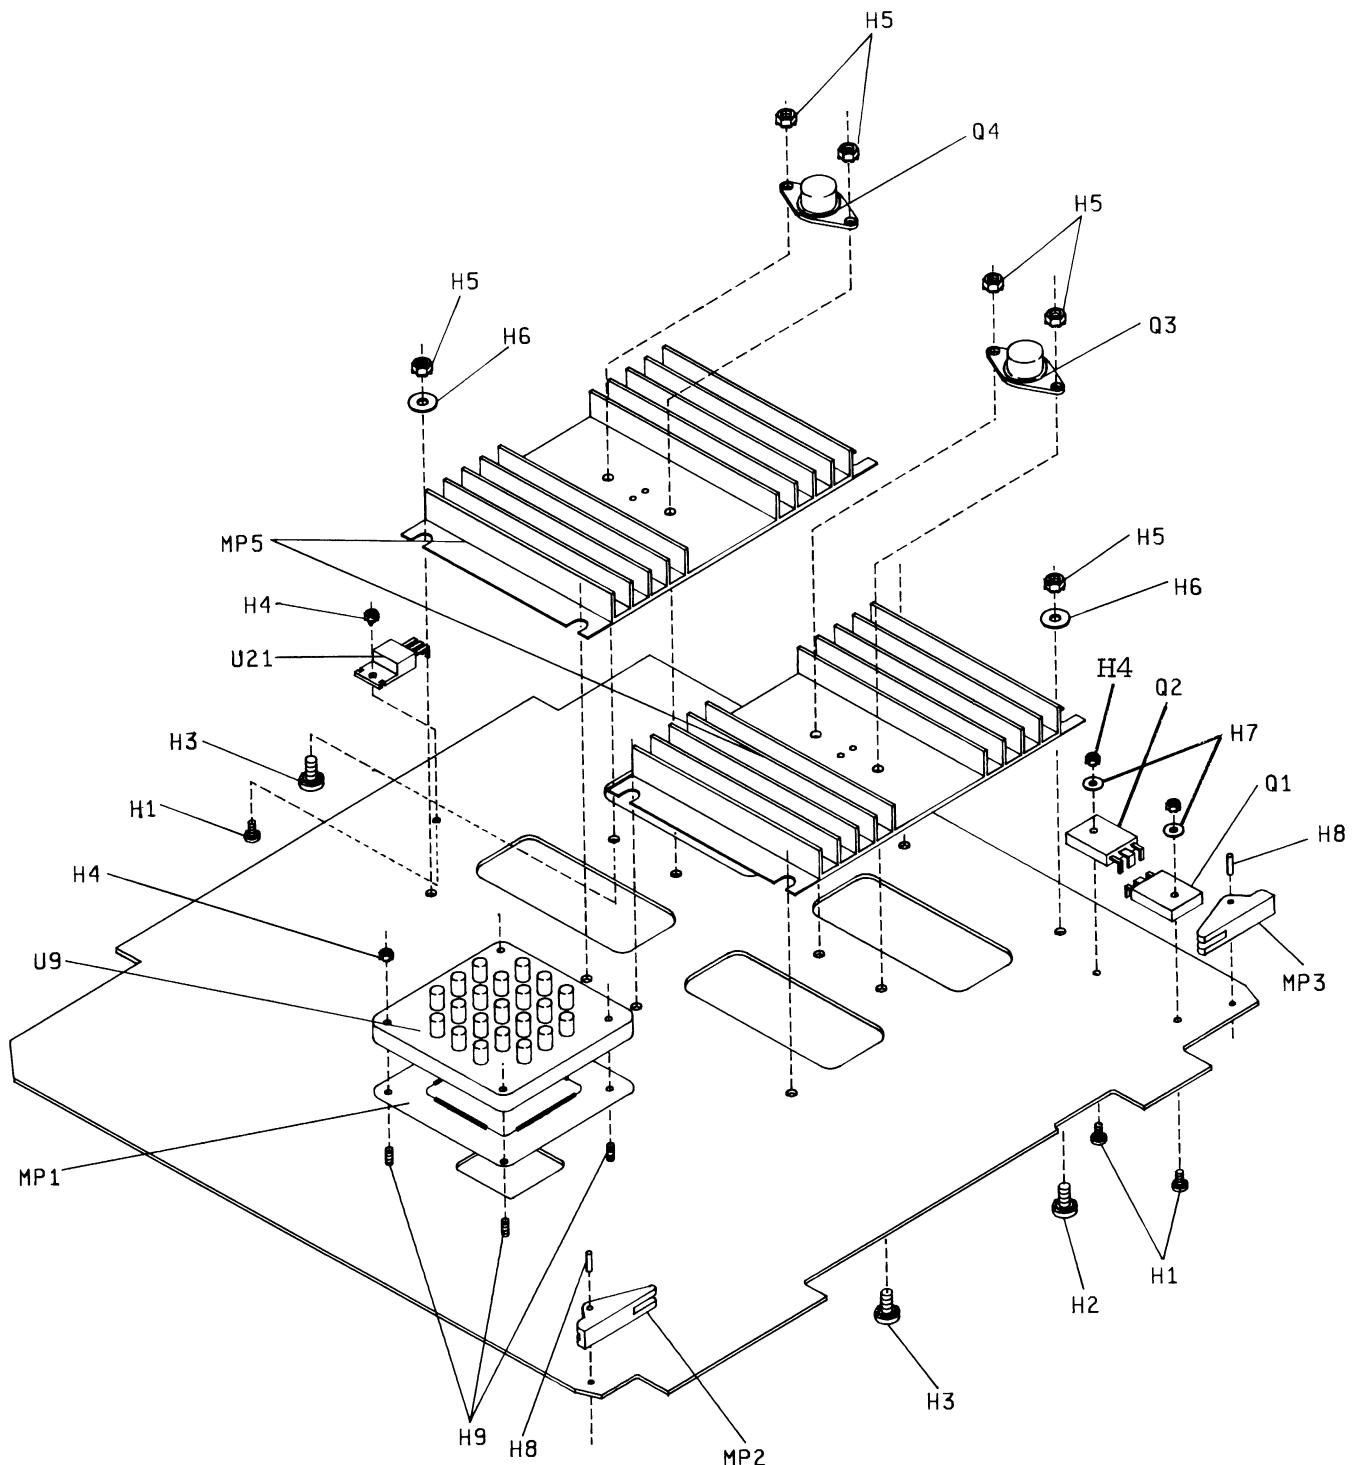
Controller PCB Illustrated Parts Breakdown
